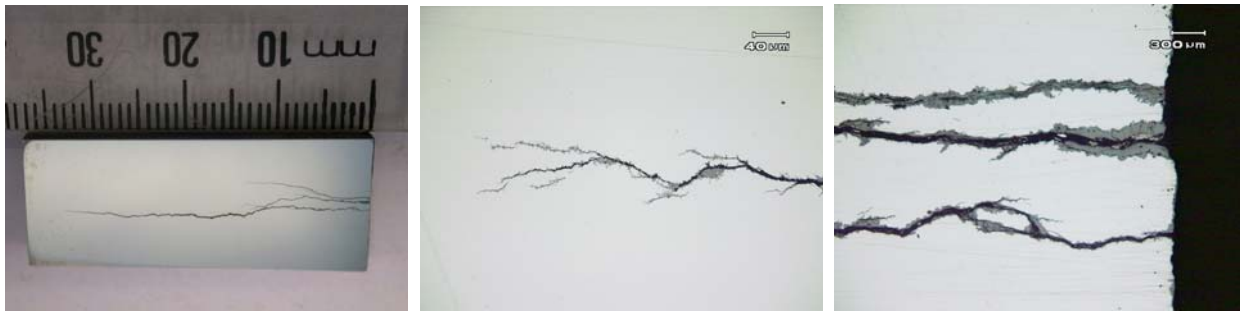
Open crack in longitudinal seam weld filled with corrosion products.
